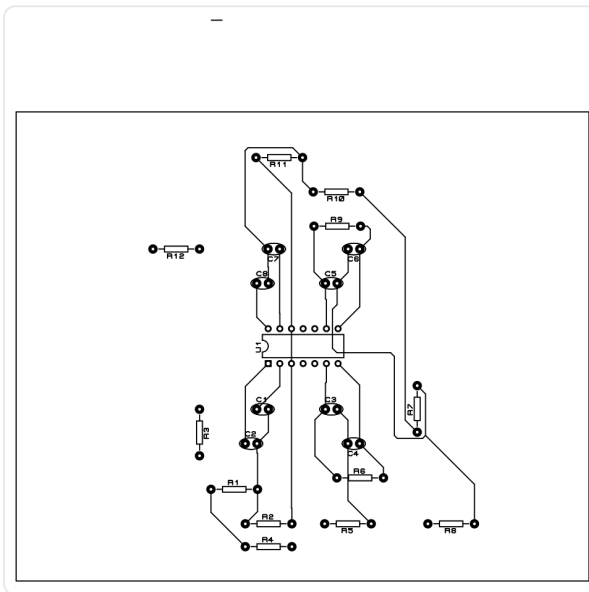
PCB bottom layer — copper routing. The connections between components are solved on a single copper side.
